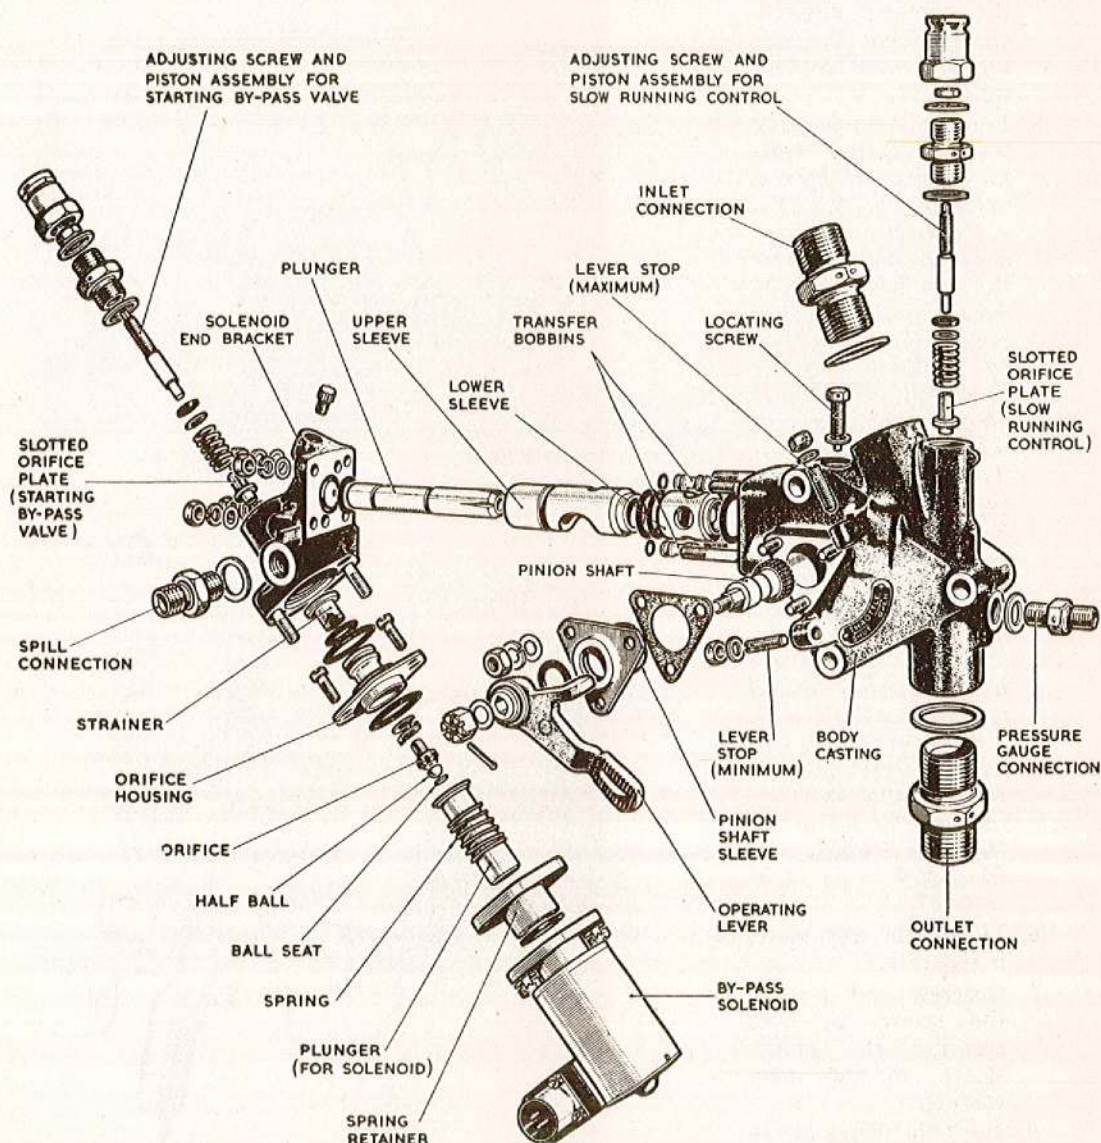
(b). T.V.B.4/7E throttle valve completely dismantled
